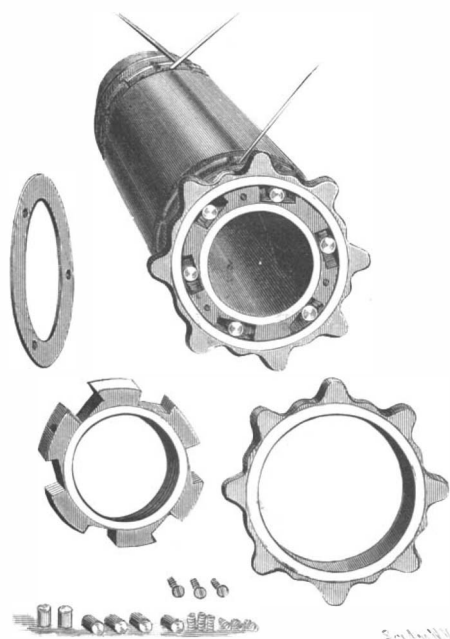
THE MORROW HUB AND DETAILS OF SPROCKET CLUTCH.
